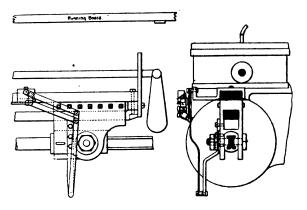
Badly designed Pentagraph Reducing Gear, attached to a Locomotive.
